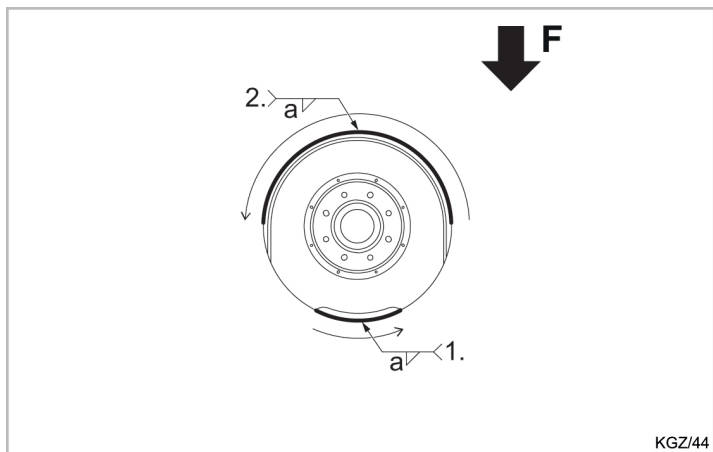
Welding sequence for KKS-I kingpins (view from below)
